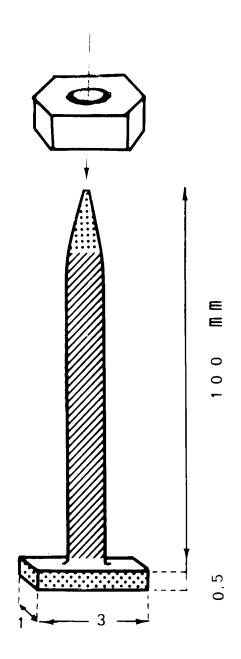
Stainless steel head bolt lathed to dimensions shown.
